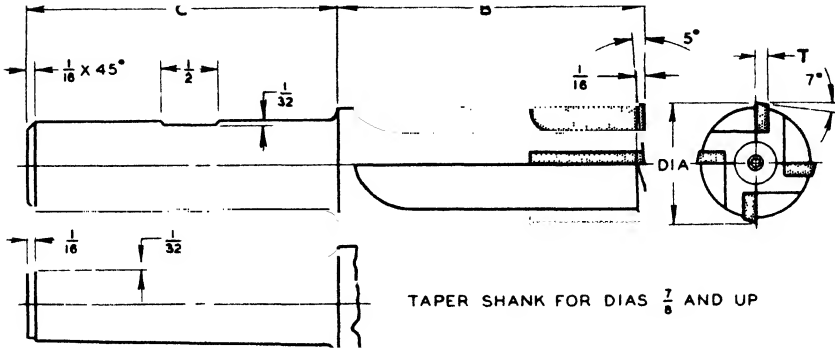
A Small, Shank-Type, Four-Fluted End Mill with Brazed-on Carbide Tips
